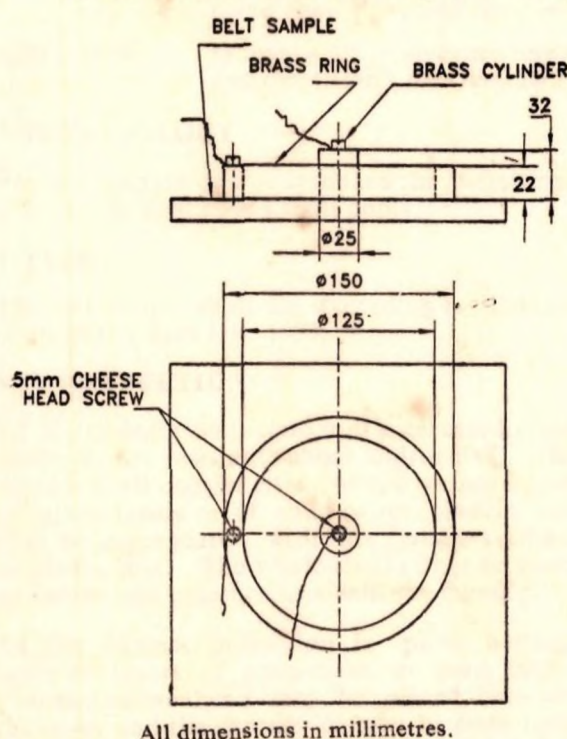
TEST LAYOUT SHOWING SUITABLE WORKING DIMENSIONS OF BRASS CONTACT PIECES
